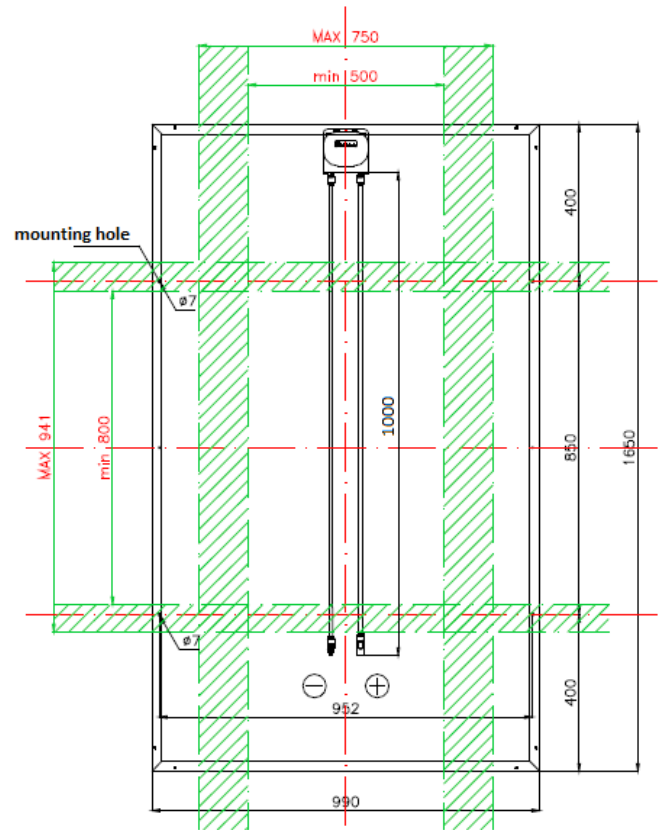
allowed positions for fixing SLA modules using mounting clamps.
